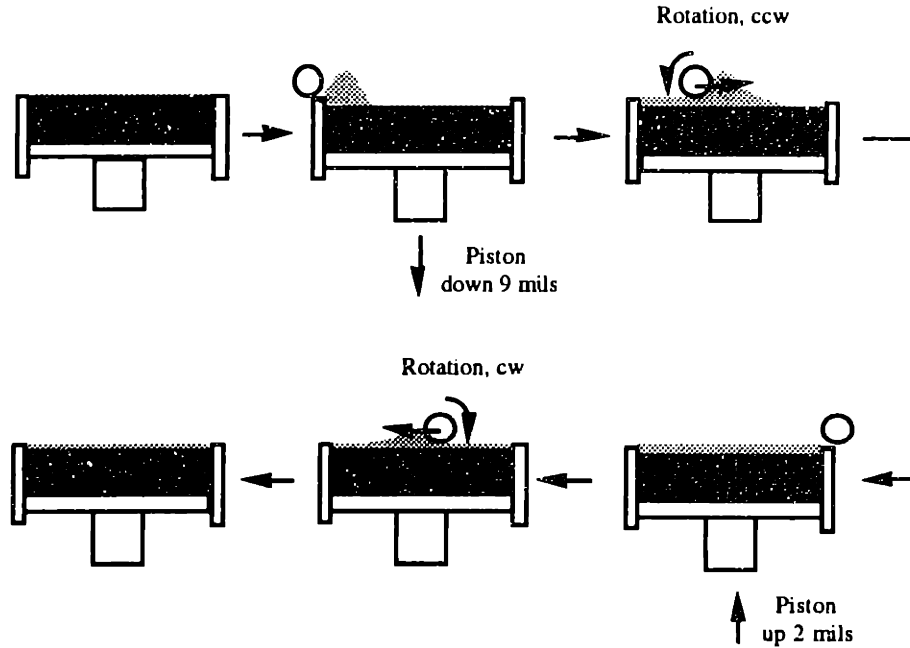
Spreading and Packing by Roller on Three-Dimensional Printing Machine
